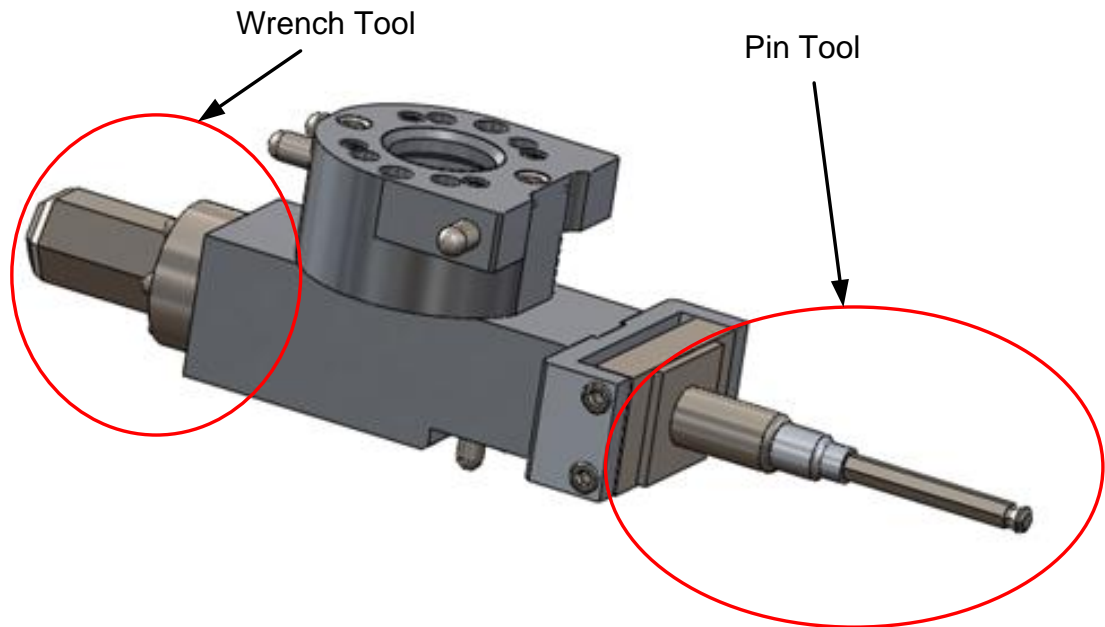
The first Prototype of combined Wrench-Pin Tool (WPT)
